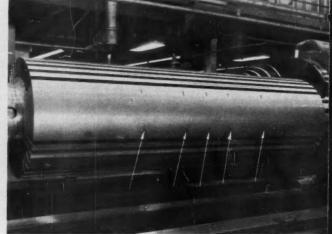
BALANCE PLUGS of variable weight are screwed into pole faces after machining. Rotor is for 30,000-kw two-pole machine.
